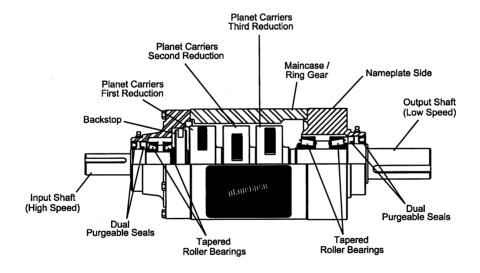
Sectional View of a Planetgear Speed Reducer
